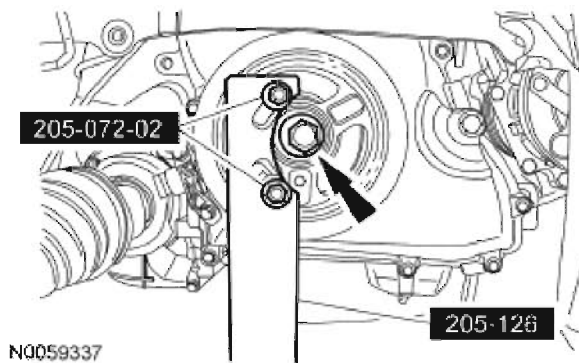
Assembling Special Tools (205-072-02 And 205-126)
